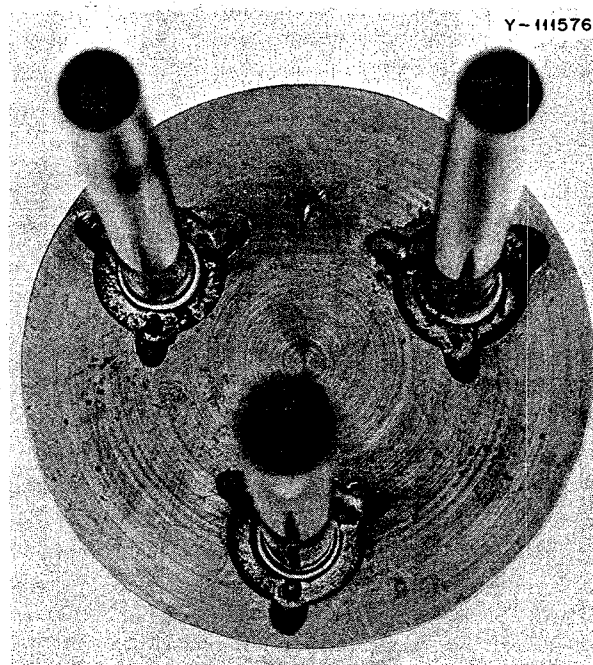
Mockup of 2-in.-diam stainless steel nozzle brazed to molybdenum tubes.
